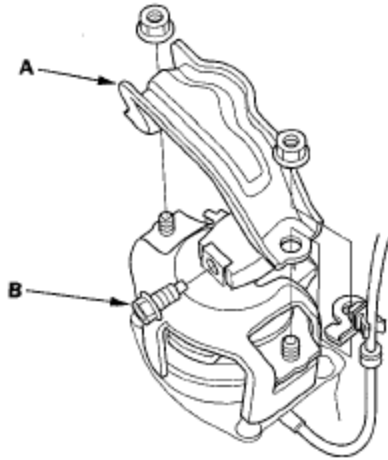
Identifying Front Mount Stop And Front Mount Bolt
